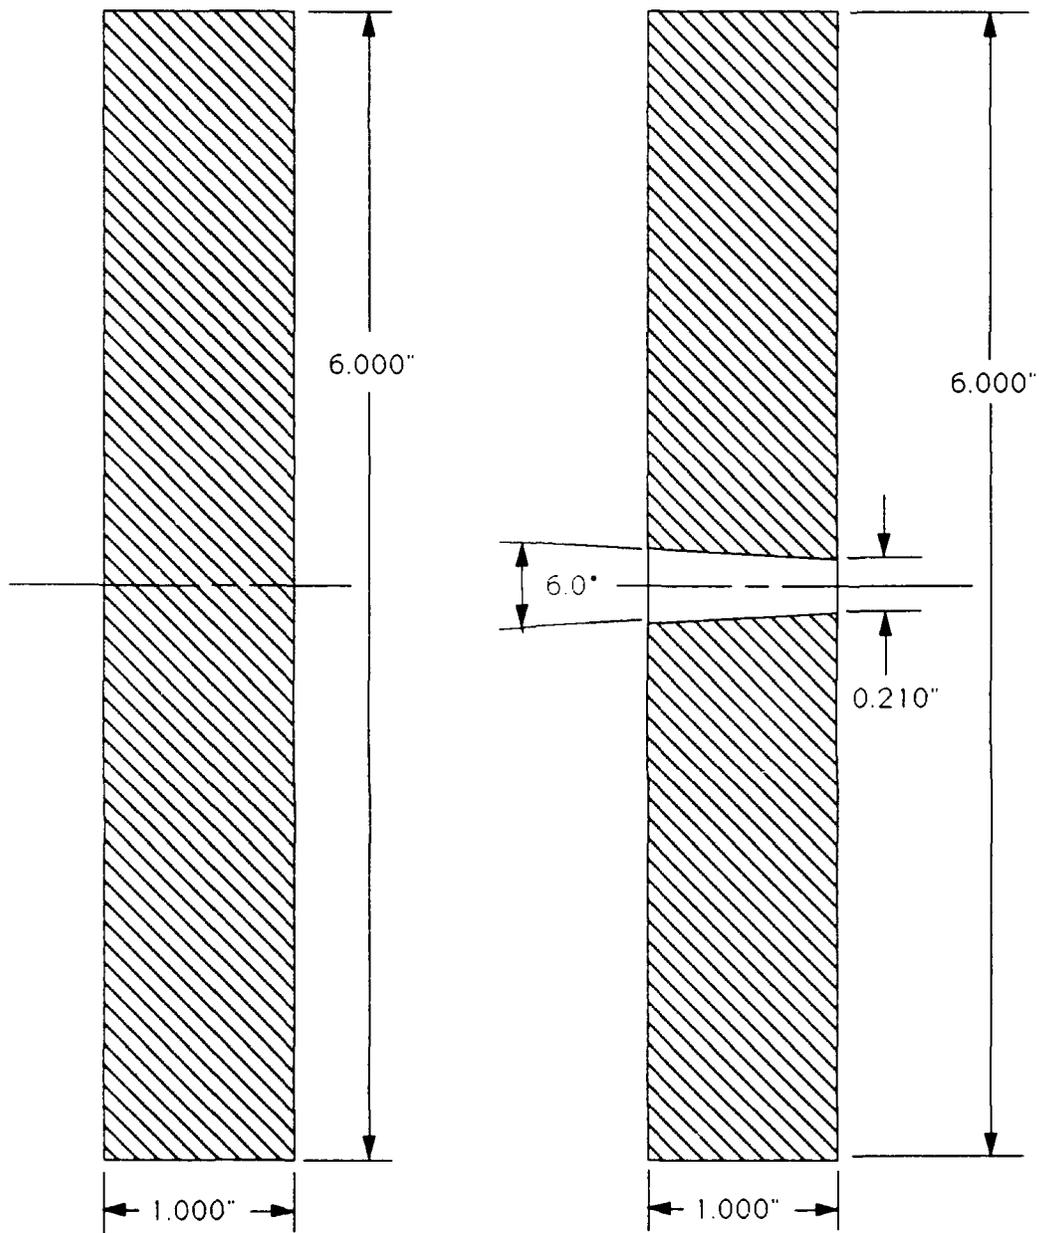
Zirconia Disk Cross-section Views. Left drawing is disk as received from supplier. Right drawing is disk ready to be joined to the zirconia tube.
